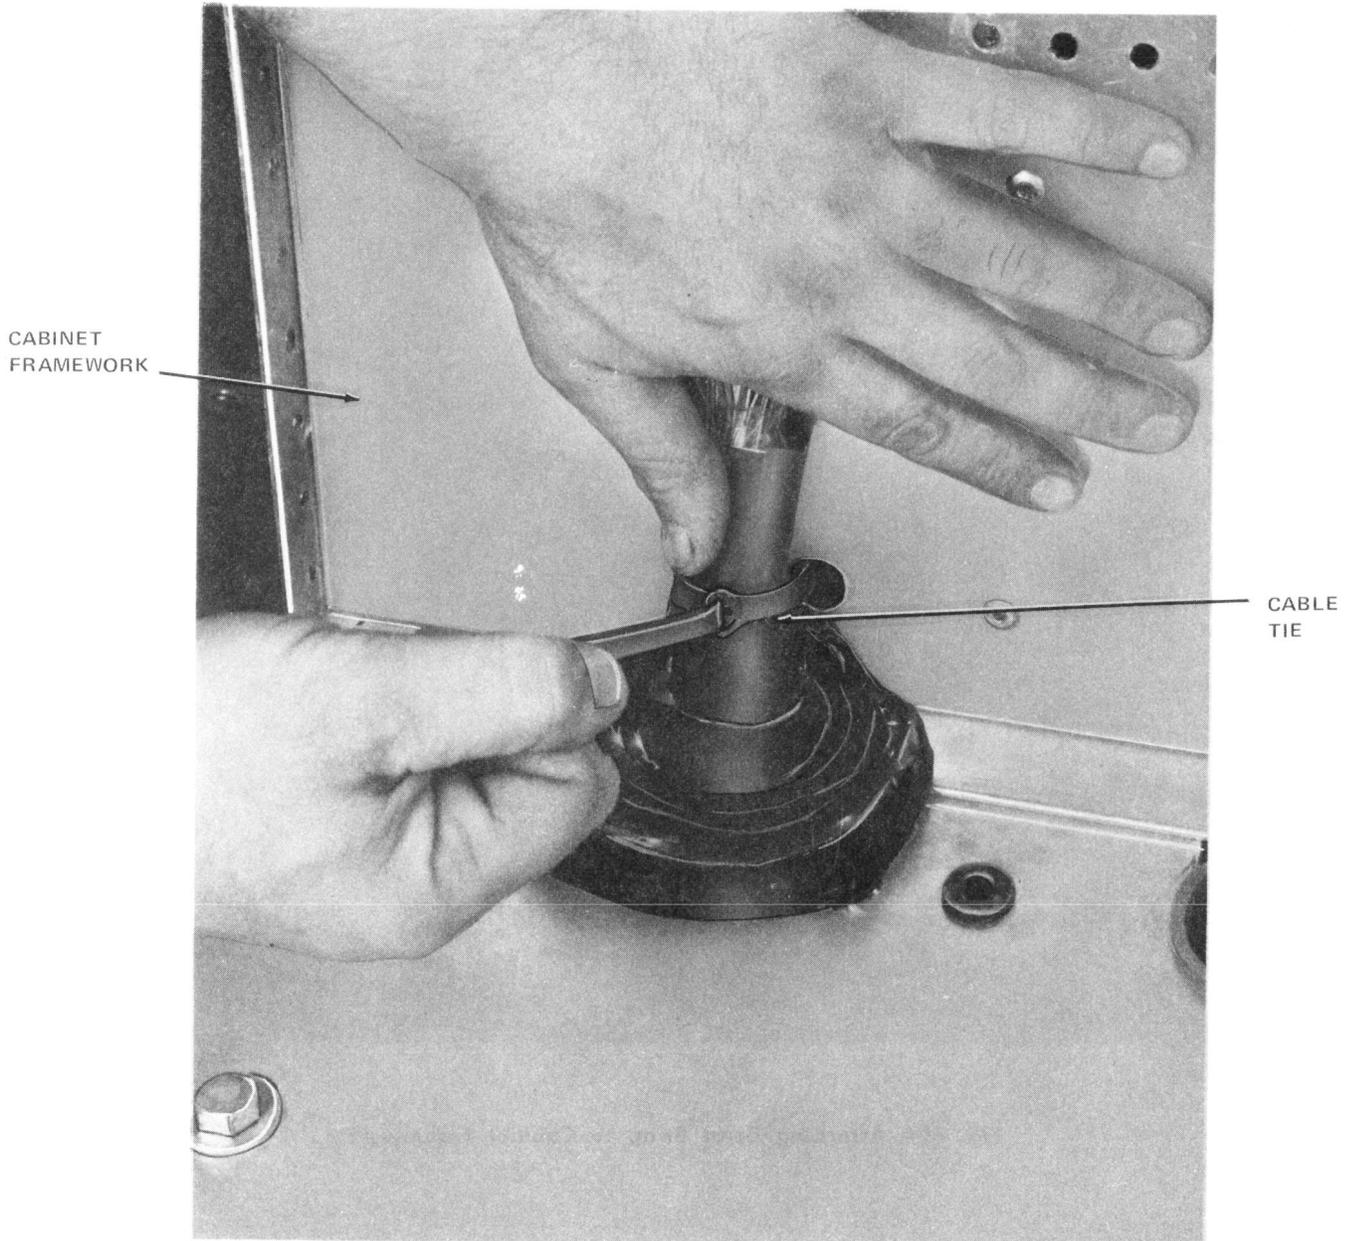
Securing Cables to Cabinet Framework Using Cable Ties
